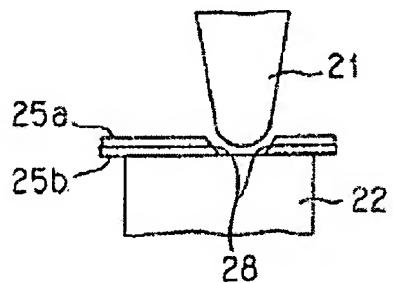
Model Enlarged Side View Diagram of an Essential Section that Shows The Aperture of the Horn and Receiving Jig
